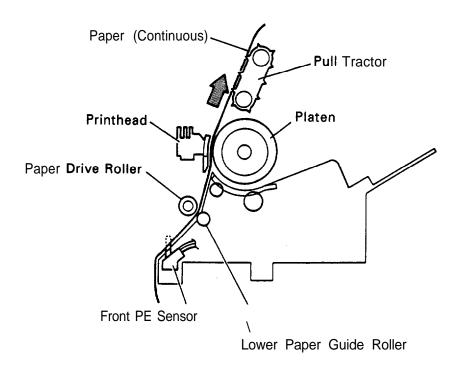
Paper Path for Pull Tractor Feeding Using the BottomEntrance
